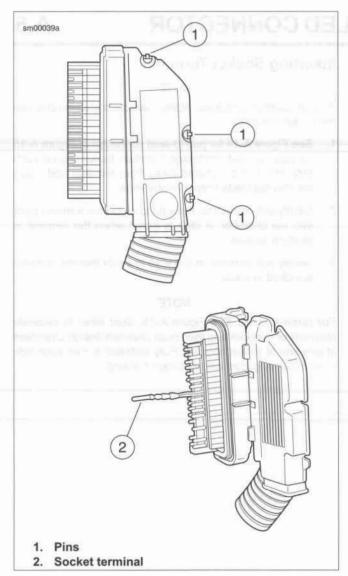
Delphi 100W Micro-Pack Sealed Connector: Separate Halves of Socket Housing
